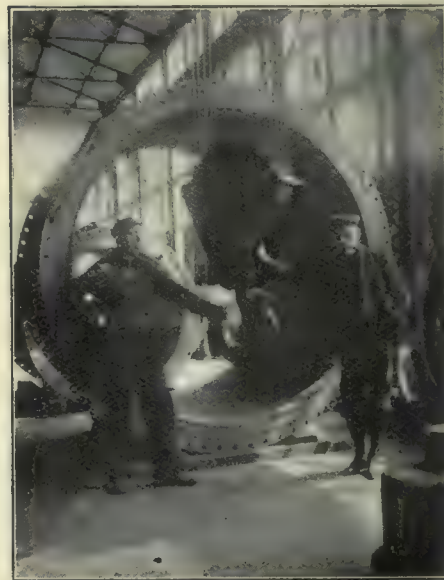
Low Pressure Cyl. Inglis 15,000,000 Pump and Engine.
